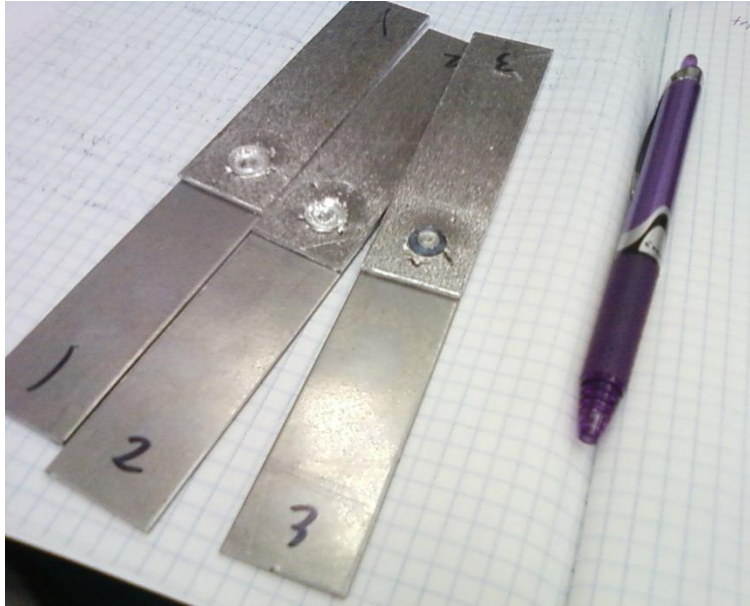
Welded and marked samples, ready for lap shear strength testing
